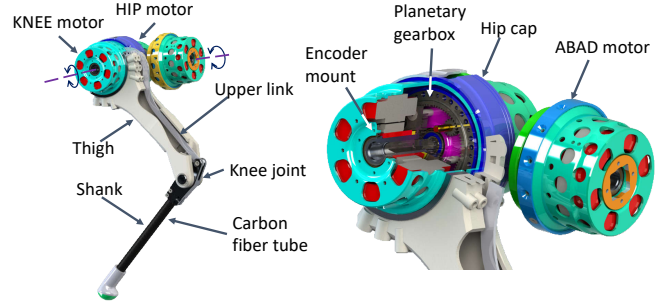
Configuration of motors and the linkage design (left). Cross-section view of the HIP-KNEE module, showing the gearbox and motor (right)
